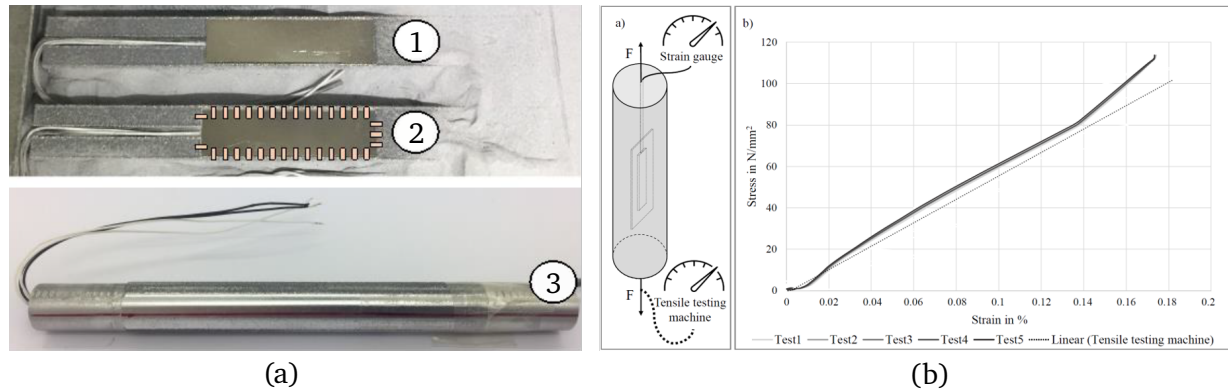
The weldable strain gauge is inserted into a cavity of the LPBF-manufactured tension rod and bonded to it with welding seams that are created using the LPBF-process (a) [91]. Tensile tests show that a force transmission from the LPBF-manufactured tension rod to the integrated strain gauge is ensured, while some kinks are present in the data measured (b) [91].
